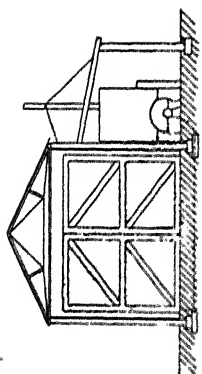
Wells' Timber-drying apparatus with positive circulation. Cross-section.
